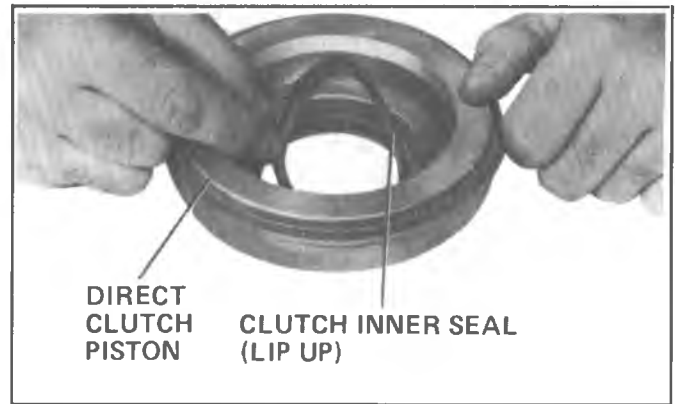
A1-113 Removing Direct Clutch Piston Inner Seal
